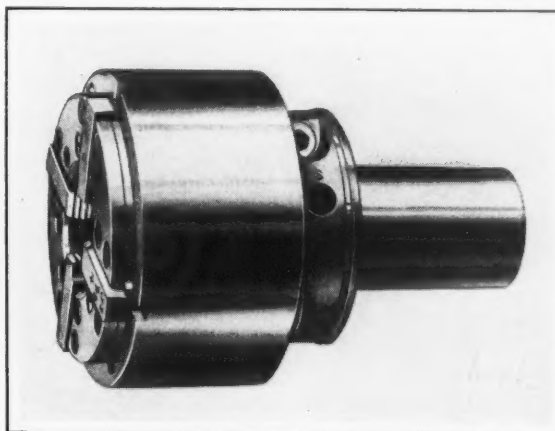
Die-head which can be Adjusted without Removing from Holder
